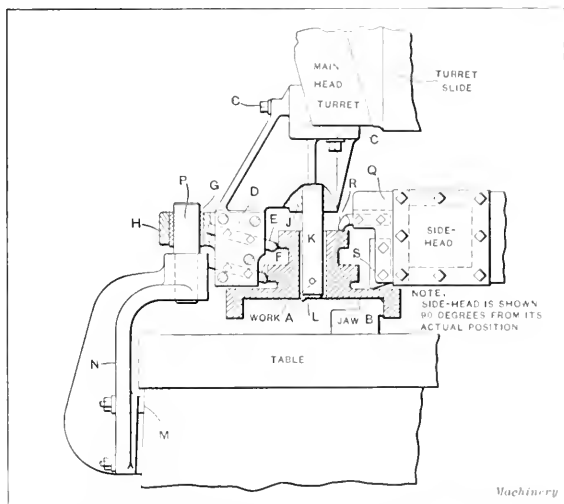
Piloted Multiple Turning Tool for Triple Gear Blank
